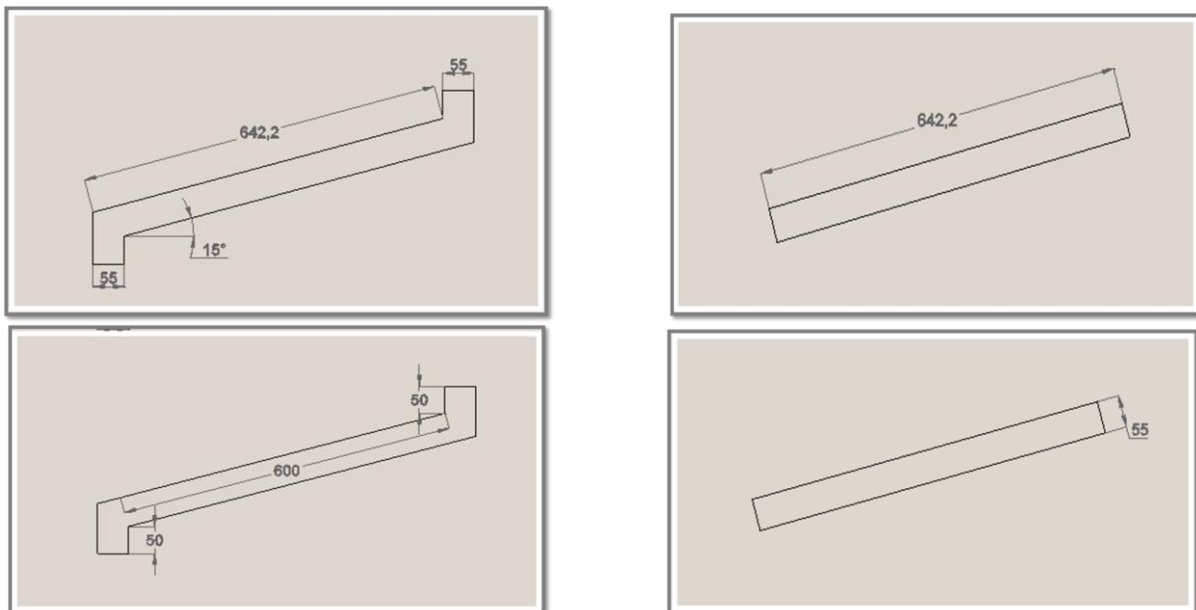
DIMENSIONS OF OTHER TUNNEL PARTS
